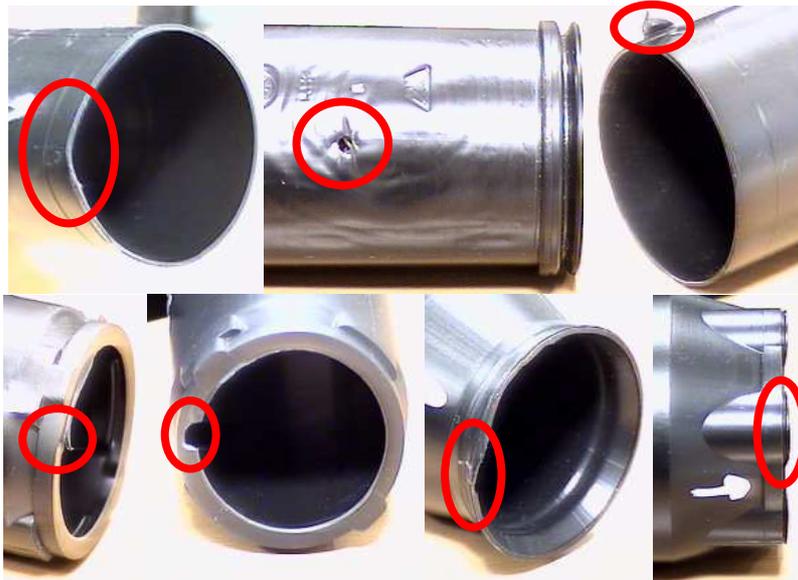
From left to right and top to bottom: a deformed tube, a hole, a burr and diverse defective cuts.
